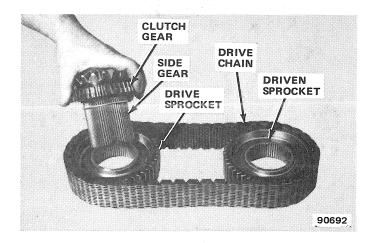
D-52 Side Gear, Clutch Gear, Sprockets and Chain Assembly
